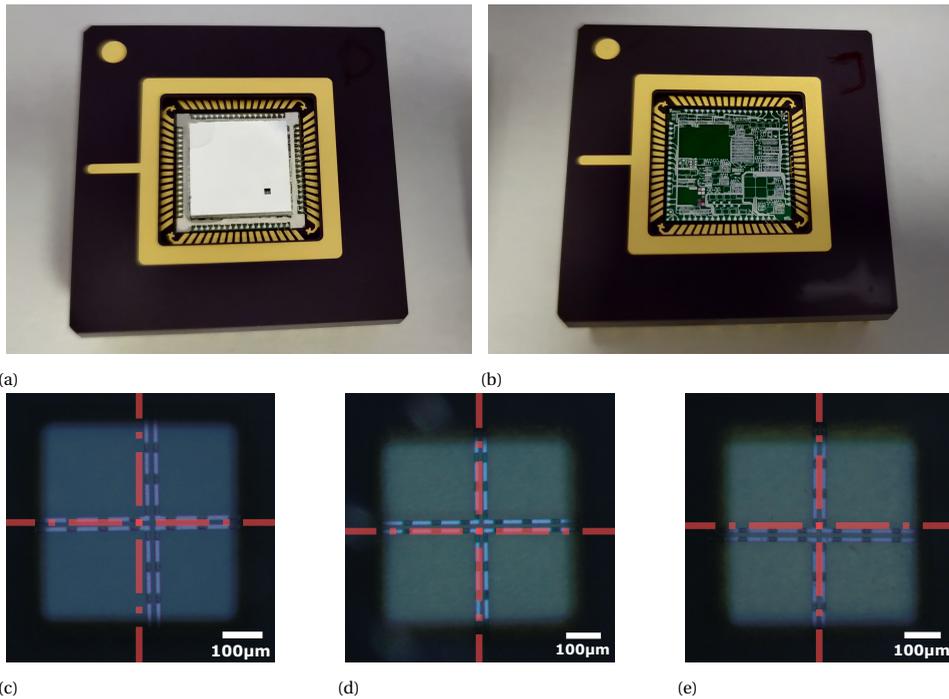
Photographs of the a) packaged quadrant sun position sensor and b) packaged bare multi-project chip. The aperture alignment is verified for c) device 1, d) device 2 and e) device 3 by optical inspection.
